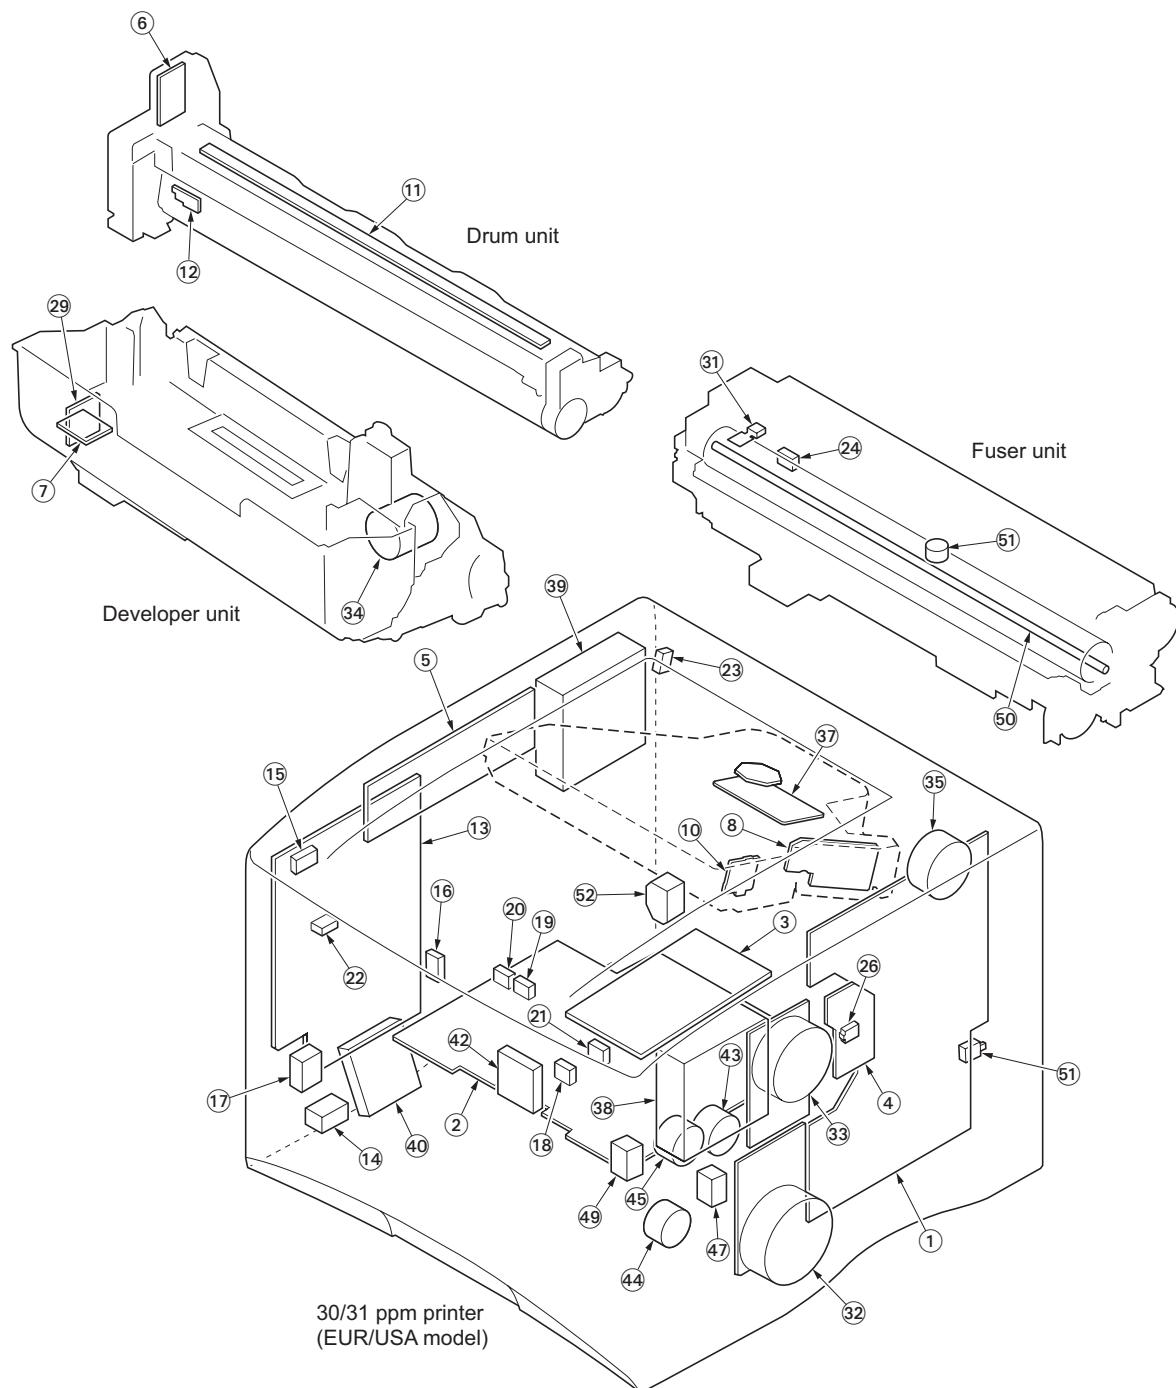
Electrical parts layout (30/31 ppm printer [EUR/USA model])
